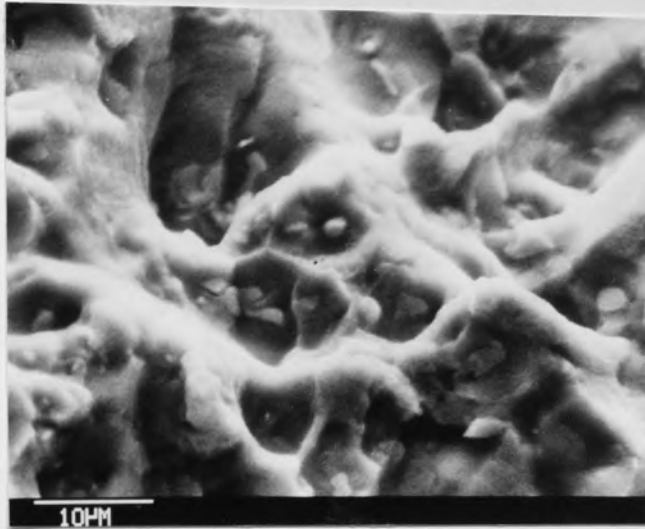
Dimpling in a 2014-T6 fatigue fracture surface.
